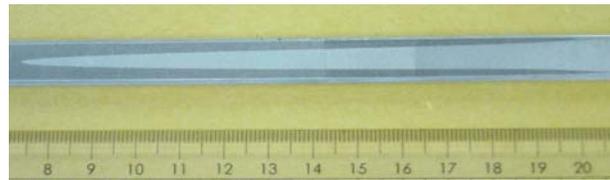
X-ray photographs of indirectly co-extruded fuel rods.
